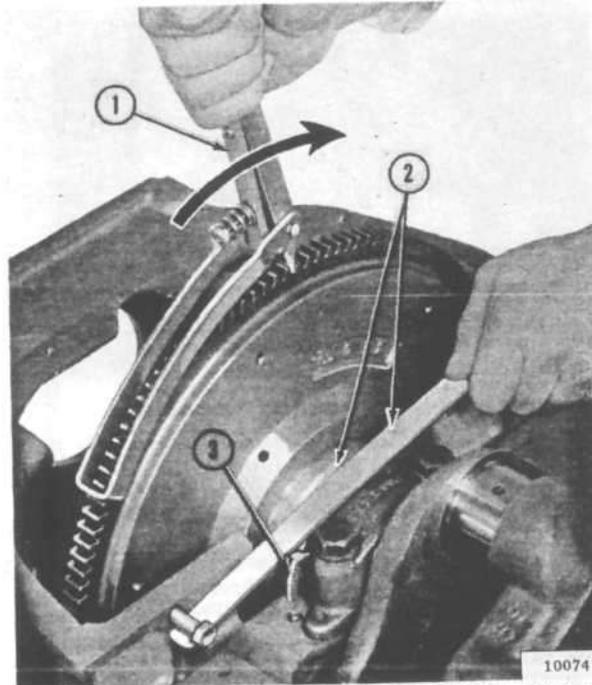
REMOVING REAR FILLER BLOCK GUARD
